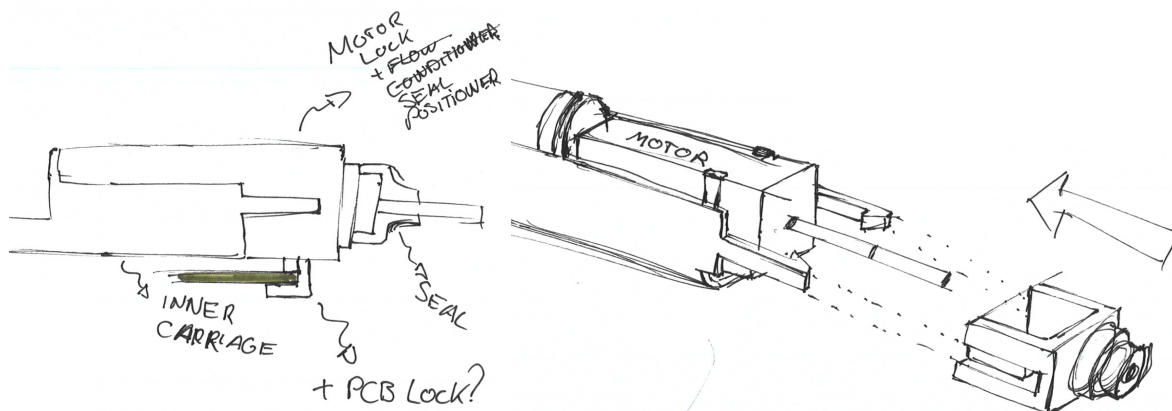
A single part is used to fix both the motor and PCB in place and functions as the top seal positioner.
